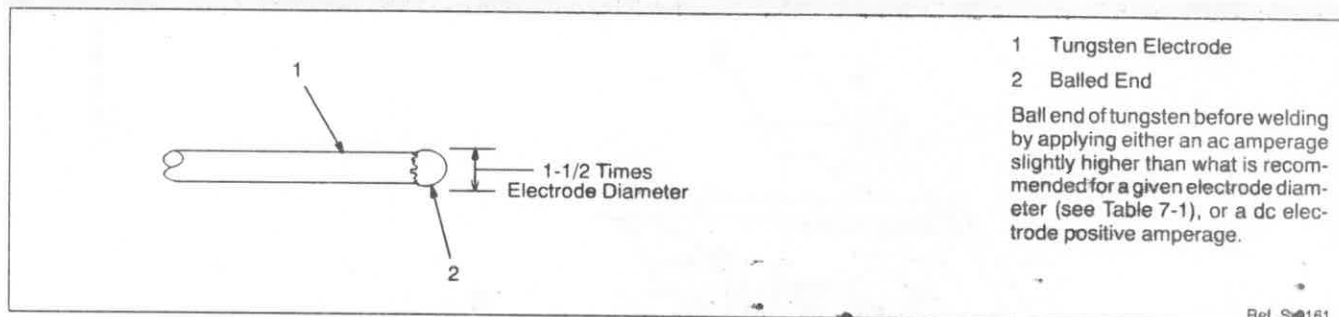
Preparing Tungsten For AC Or DC Electrode Positive (DCEP) Welding
